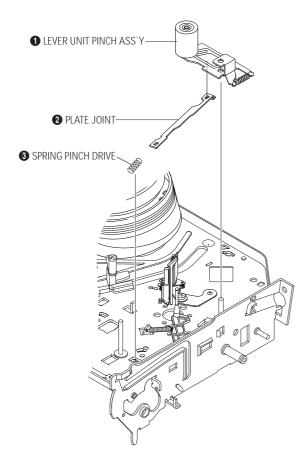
Lever Unit Pinch Ass'y, Plate Joint, Spring Pinch Drive Removal
